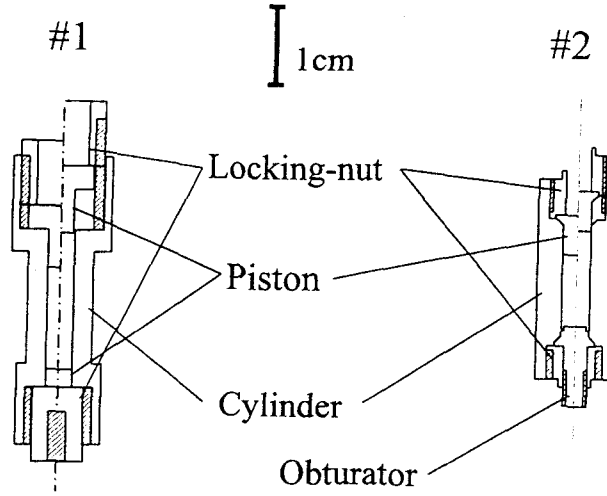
Schematic drawings of the piston-cylinder type self-clamping pressure cell.
